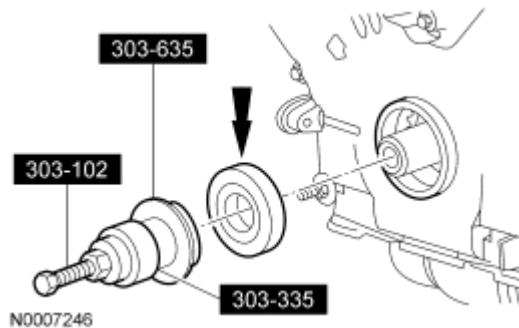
Installing Crankshaft Front Seal Using Special Tools (303-102, 303-335, 303-635)
